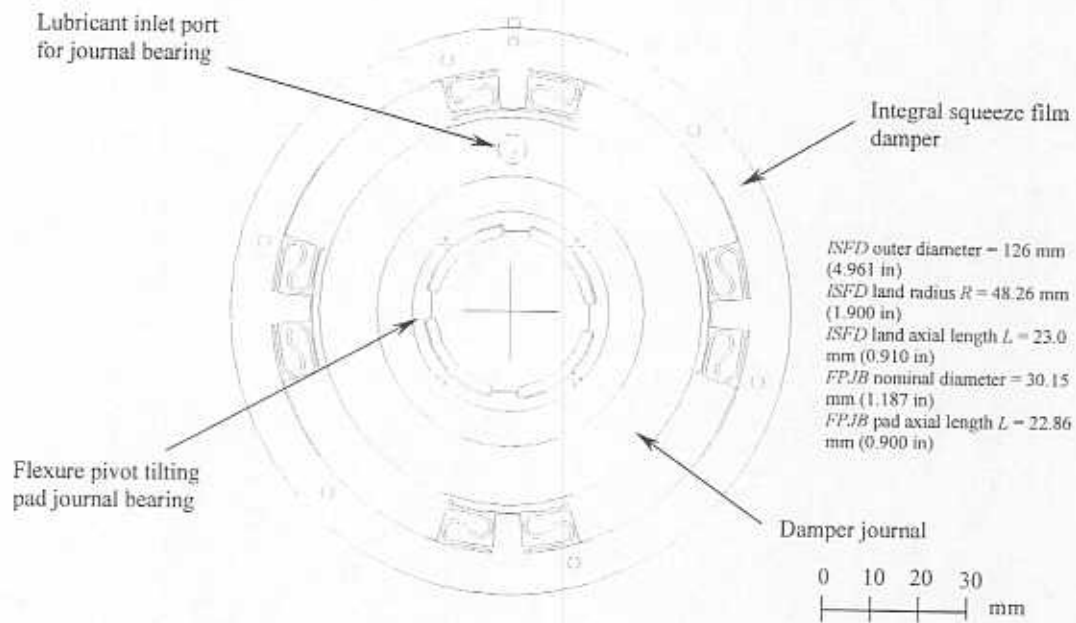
Integral squeeze film damper and flexure pivot tilting pad journal bearing assembly
